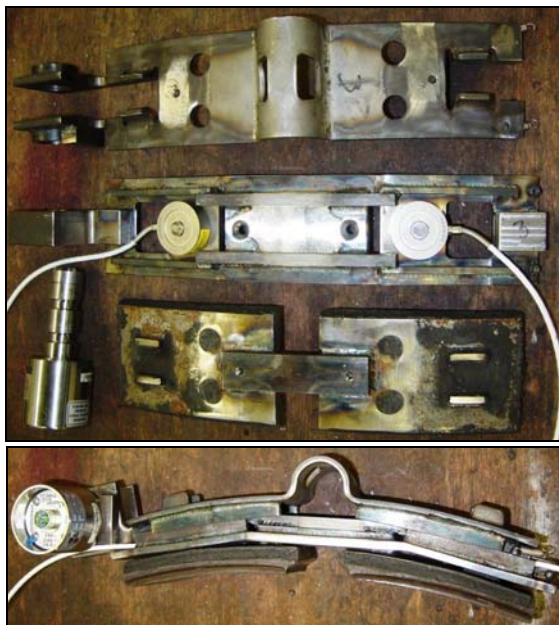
Instrumented Brake Shoe (Top: Disassembled Top View, Bottom: Assembled Side View)
